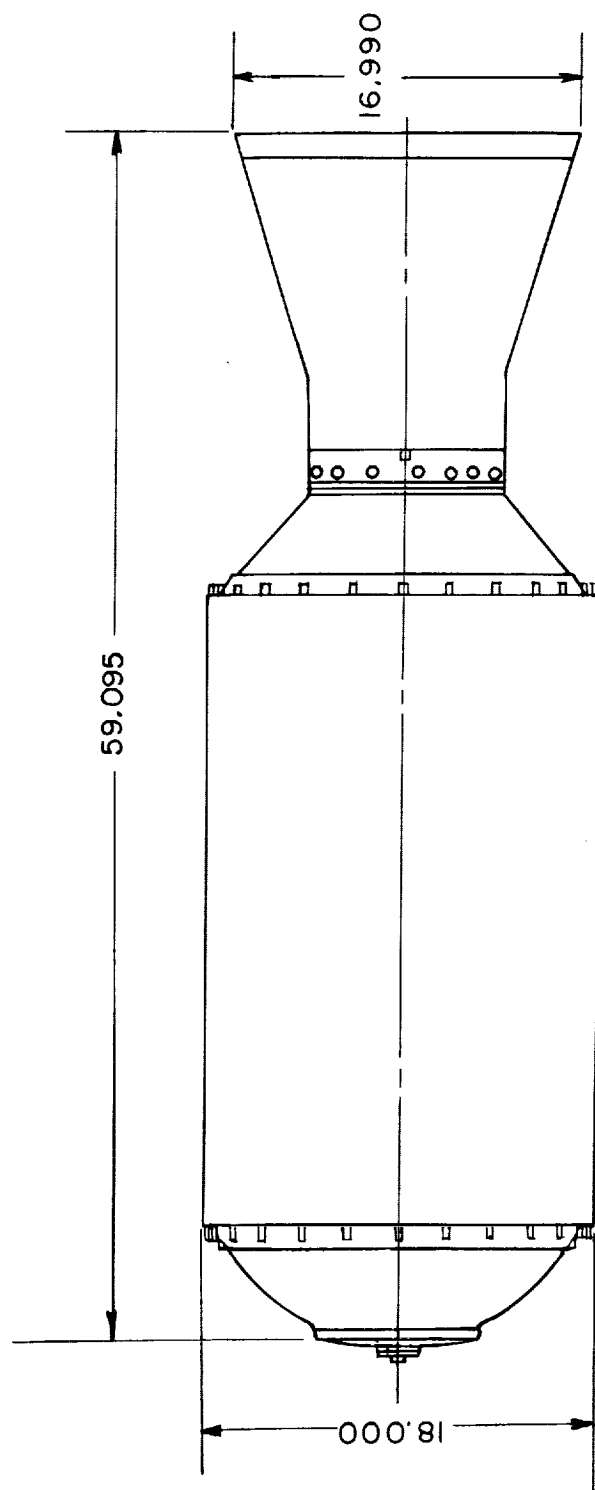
External view of Altair rocket motor. All dimensions are in inches.
